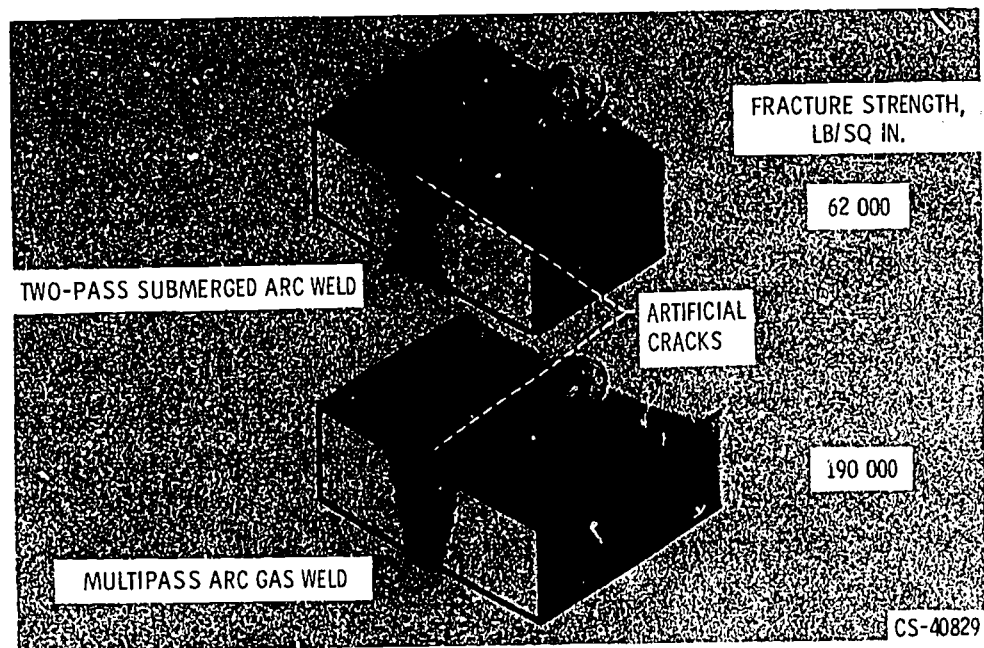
Types of weld used in manufacturing 260-inch-diameter solid propellant rocket casings.
